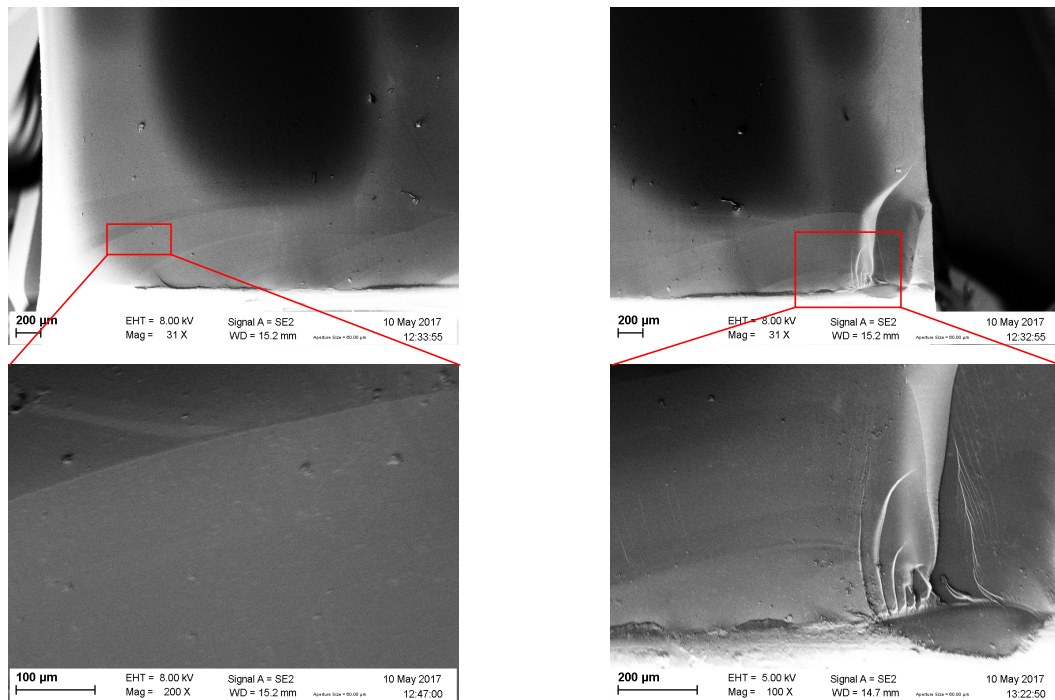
Fracture surface of the sample 17. On the left: Stop lines of the fatigue testing. On the right: Initiation area of the failure.
